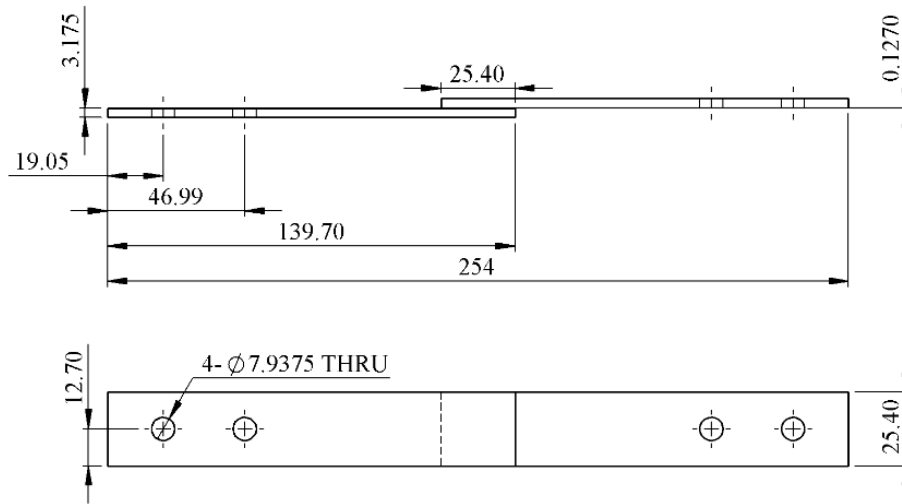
Geometry and dimensions of fatigue SLJ specimens (all dimensions in mm)
